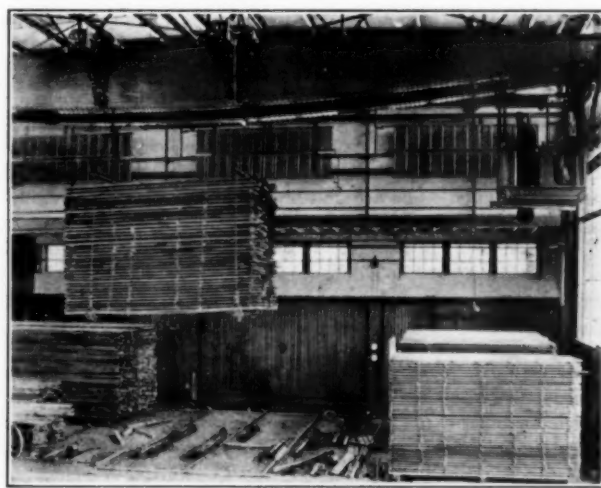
EIGHT-TON TRAVELING CRANE HANDLING 3000-Ft. KILN PACKAGE
